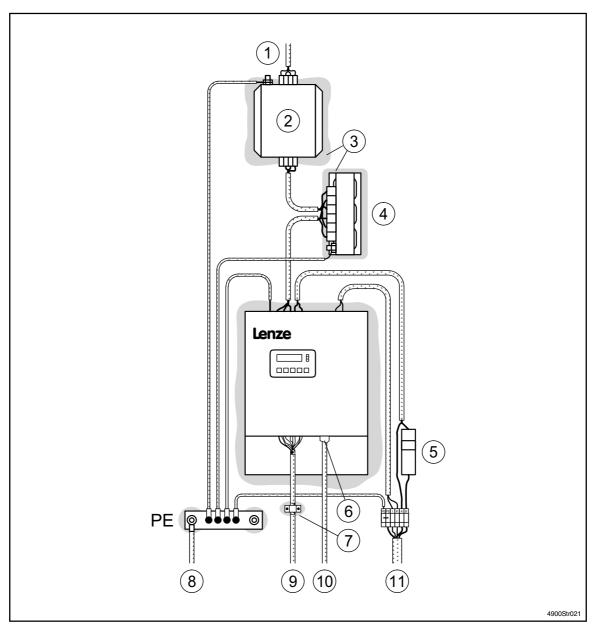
Part of the CE-typical drive system with 4902 ... 4907 on a mounting plate
